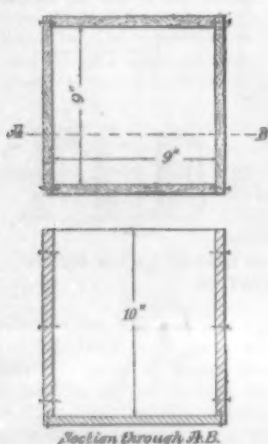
THE OUTSIDE FORM OF THE FLOWER POT MOLD.
